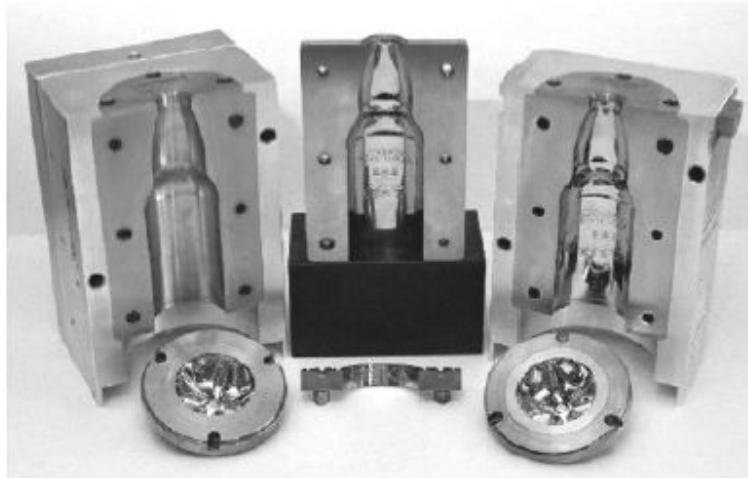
Bottle cavity inserts with independent bottom plugs. (Courtesy of Ryka Blow Molds Ltd., Mississauga, Ontario, Canada.)
